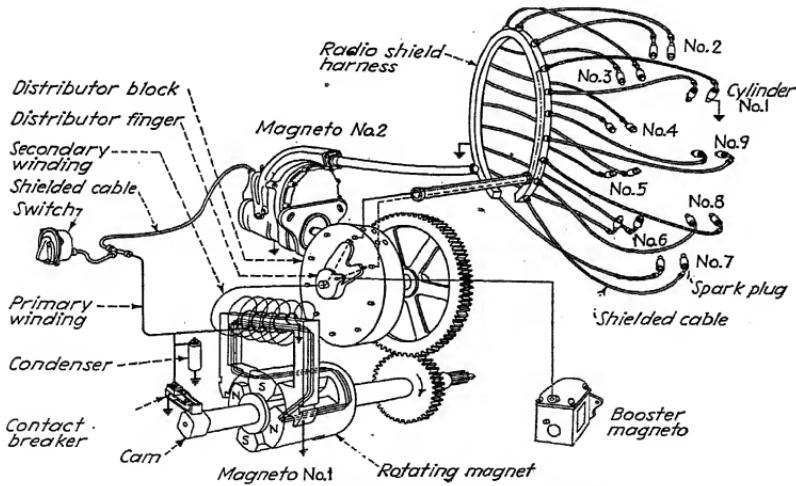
Skeleton diagram of Scintilla ignition system.
